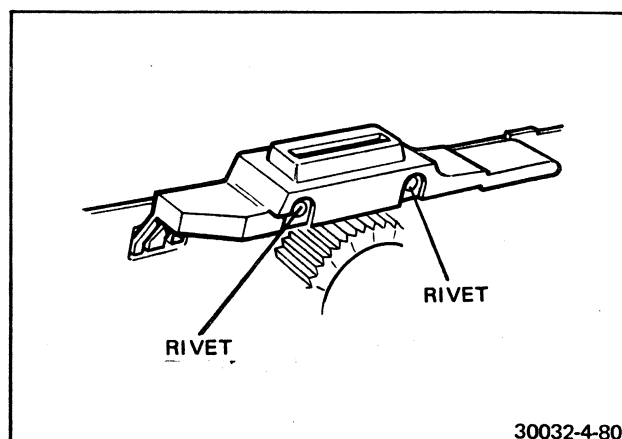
PILLAR SOCKET RIVET LOCATIONS
